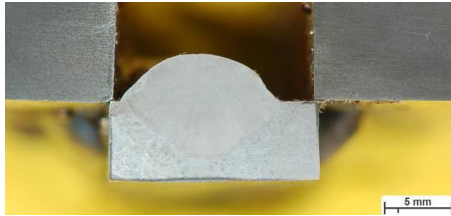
Root geometry of an exemplary reference single pass weld without magnetic arc deflection
